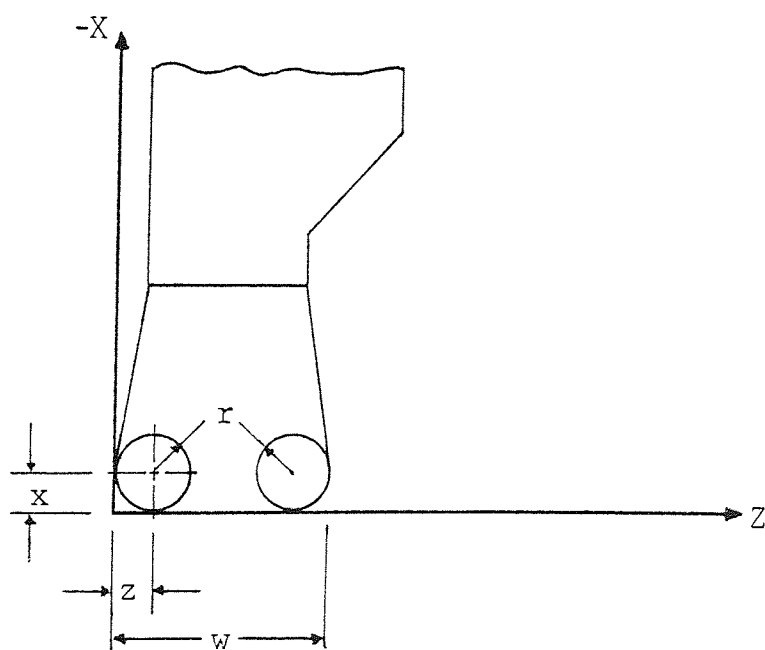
TOOL COORDINATE SYSTEM FOR PARTING-OFF TOOL
